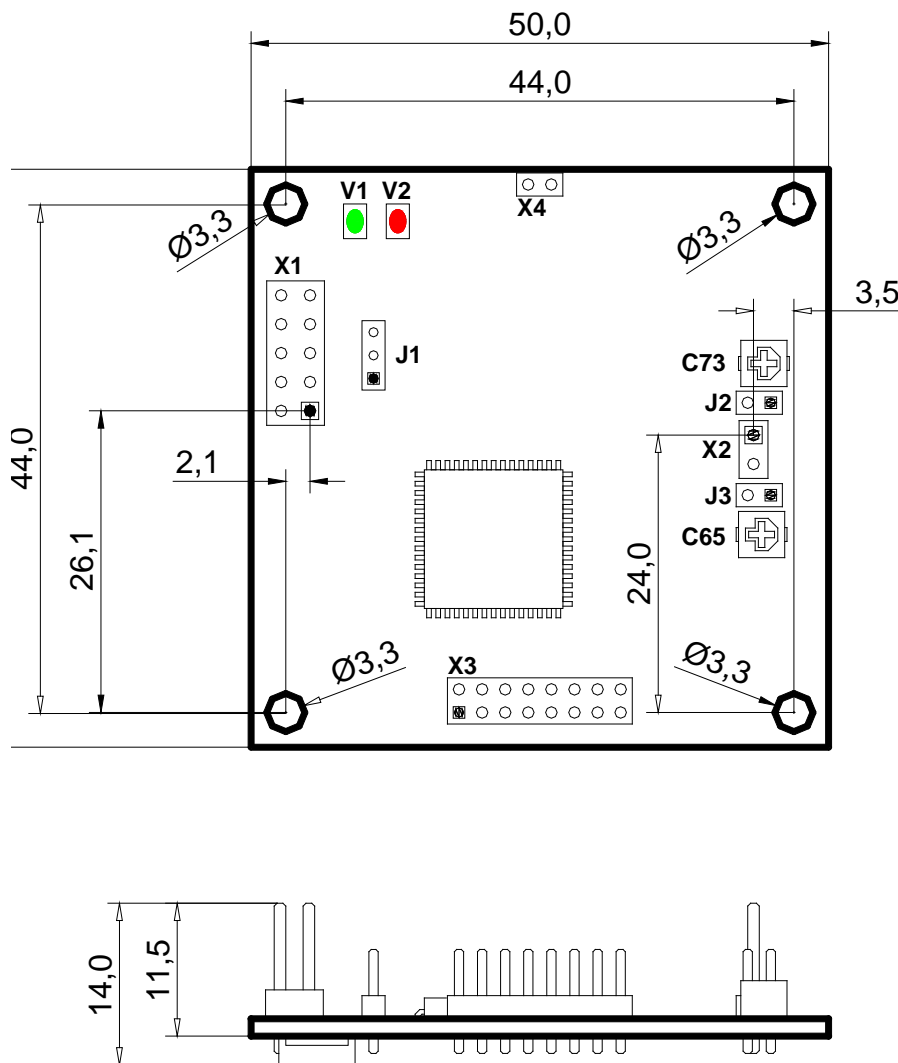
Dimensions of the ID ISC.M02 Reader Module in mm
